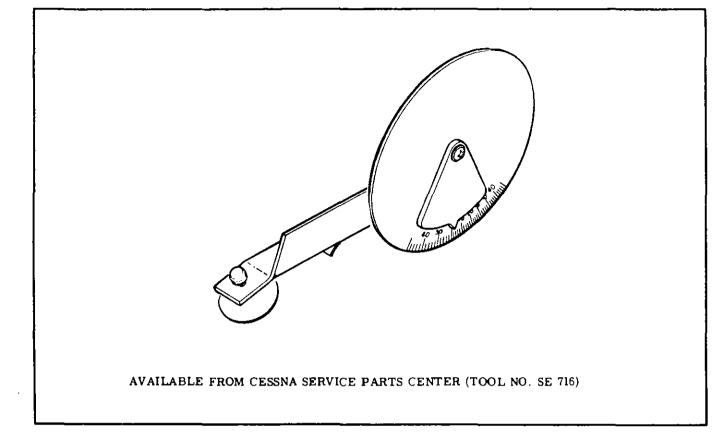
Inclinometer for Measuring Control Surface Travel
